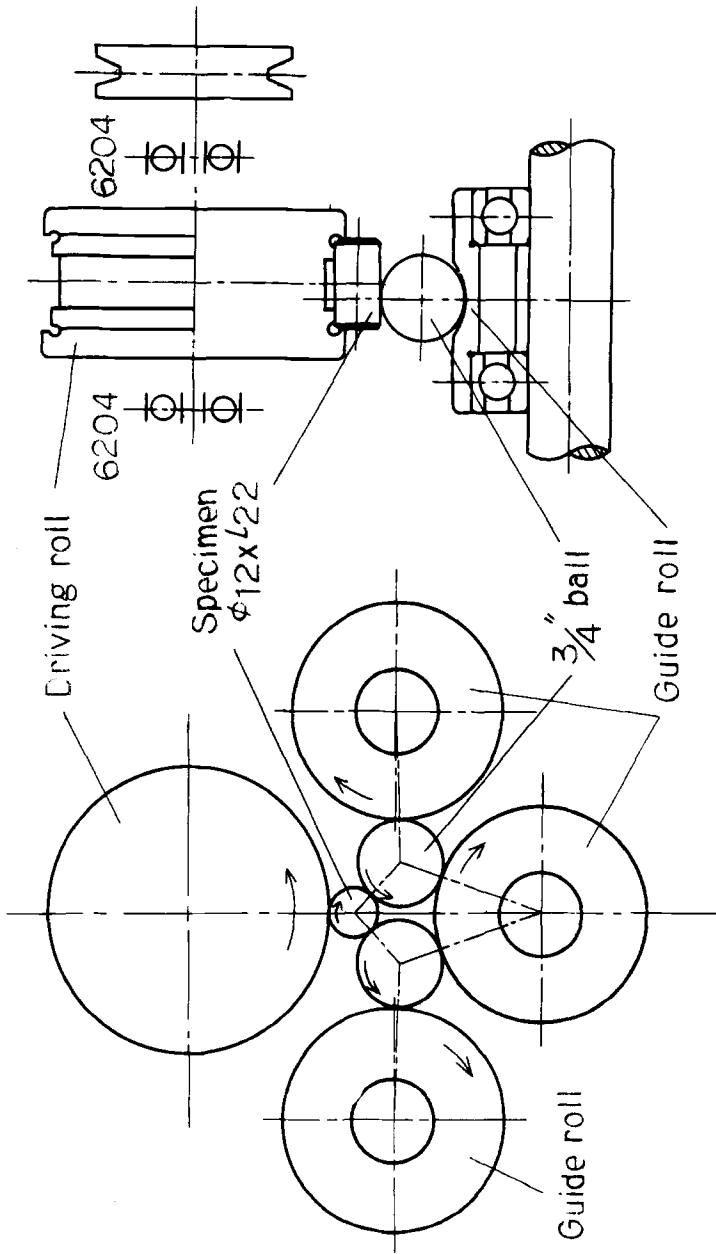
Schematic drawing of the construction of the rig illustrated in Fig. 1 ($3/4$ in. = 19.05 mm).
